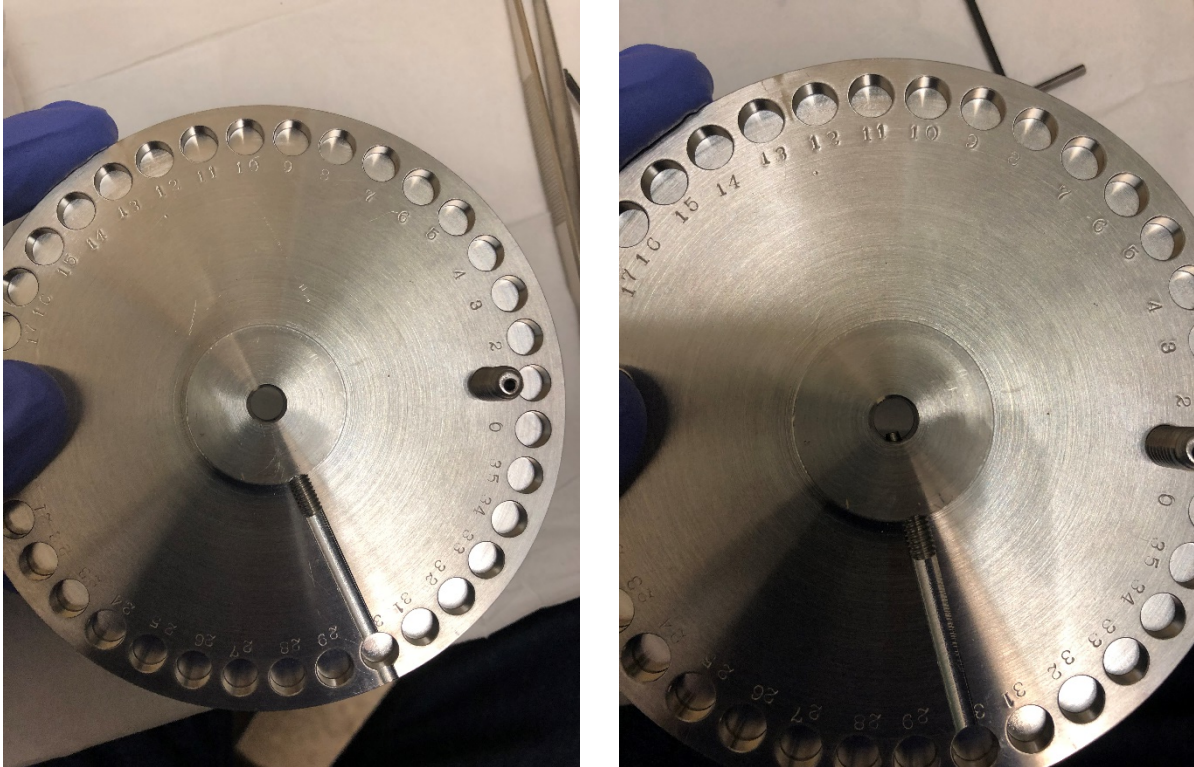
The stainless-steel carousel. (Left) the set screw is flush with the wall of the interior bore. (Right) After 1.5 turns, the set screw should engage with the carousel mechanism. Do not overtighten.
